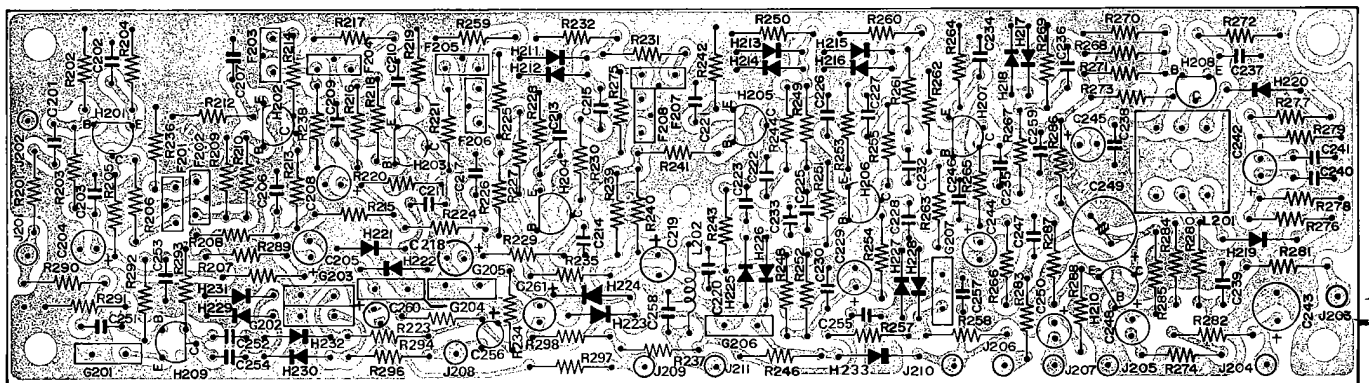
FM IF Amplifier Assembly P200 Component Locations
